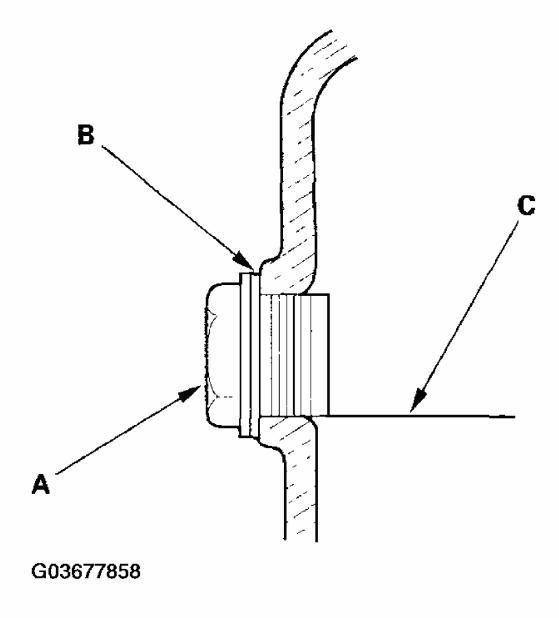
Checking Transmission Fluid Condition Courtesy of AMERICAN HONDA MOTOR CO., INC.
